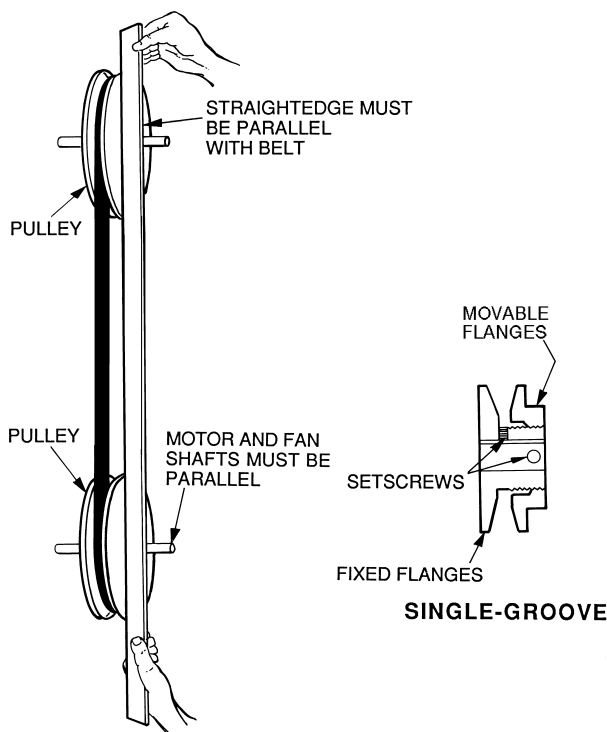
Evaporator-Fan Alignment and Adjustment
